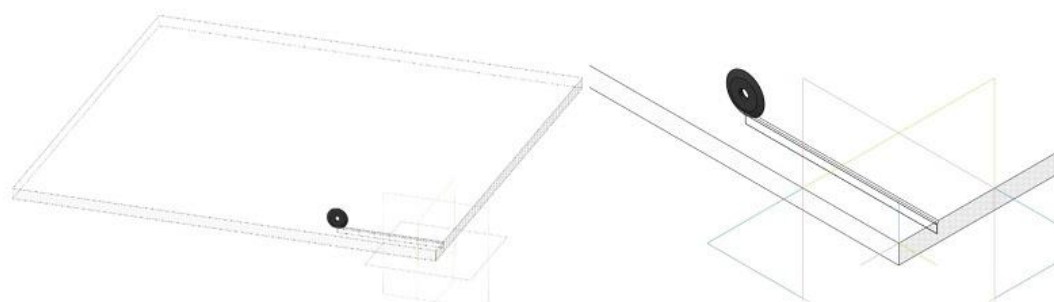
3D model of mechanical glass cutting with a cutting roller
